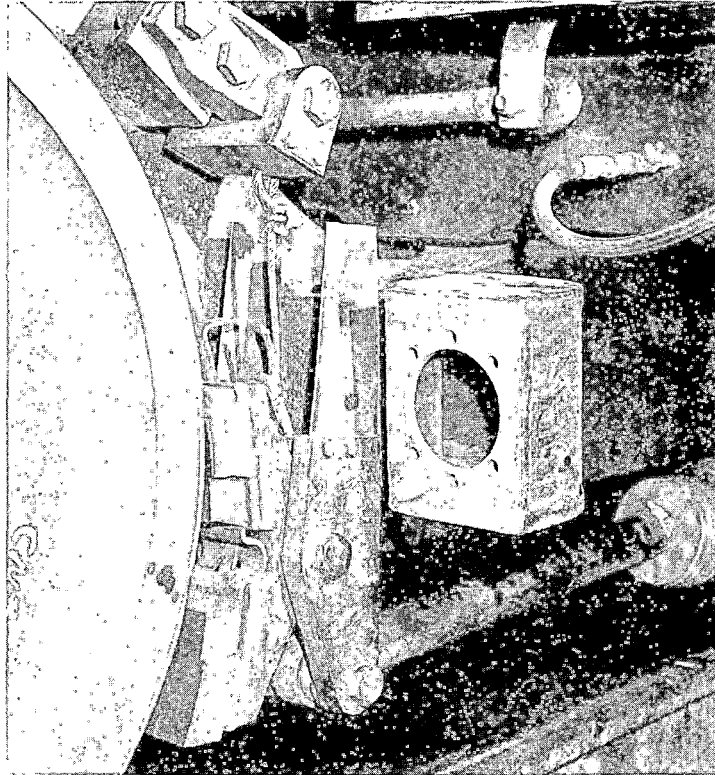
L-2 BRAKE SHOE ASSEMBLY, SHOWING FAILED BRAKE HANGERS.
